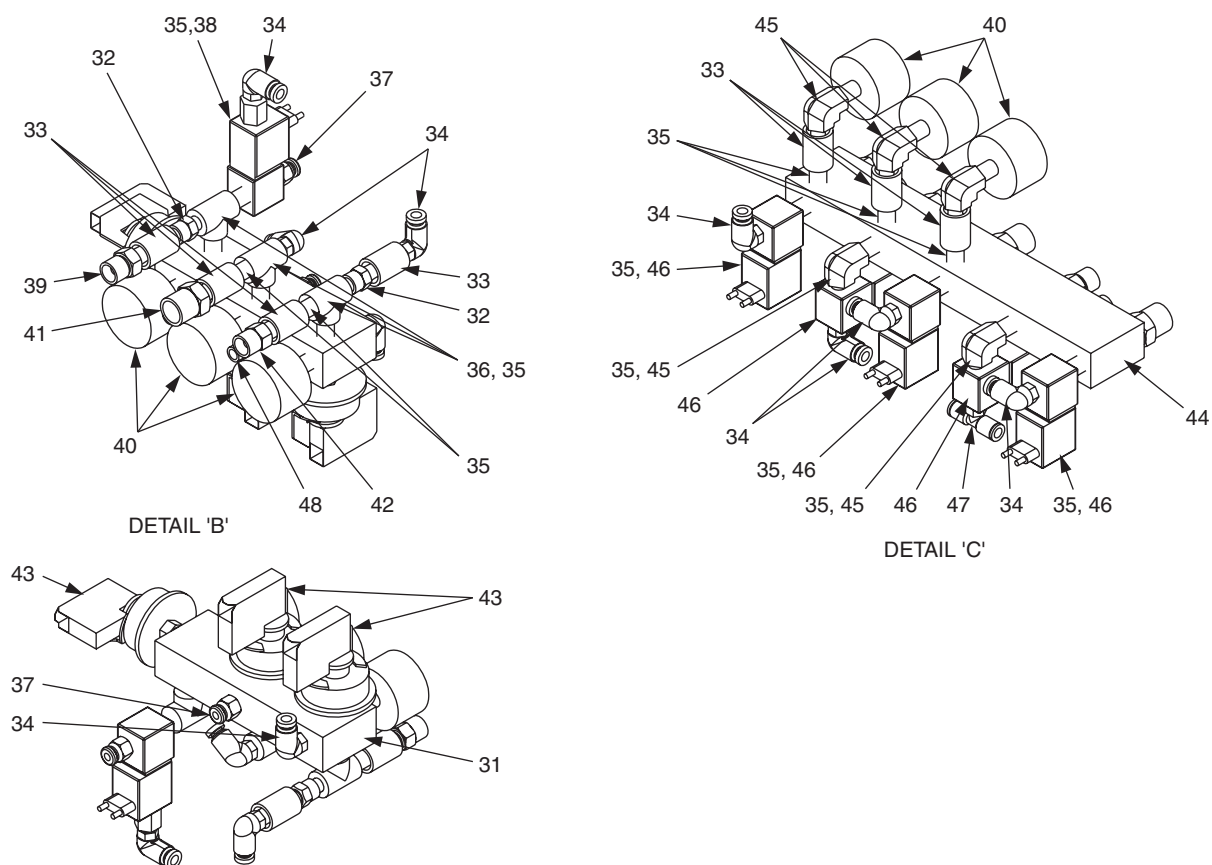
Flow Control Box, P/N 37416 (Inlet and Outlet Manifold Assemblies)
